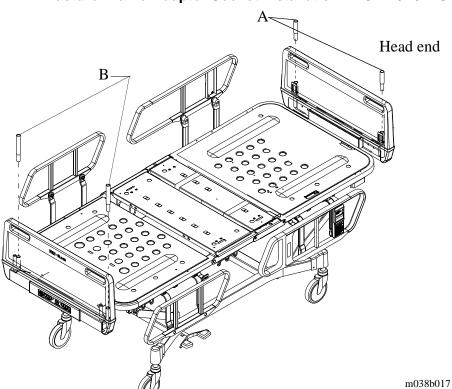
Fracture Frame Adapter Socket Installation—P847B/P847C
